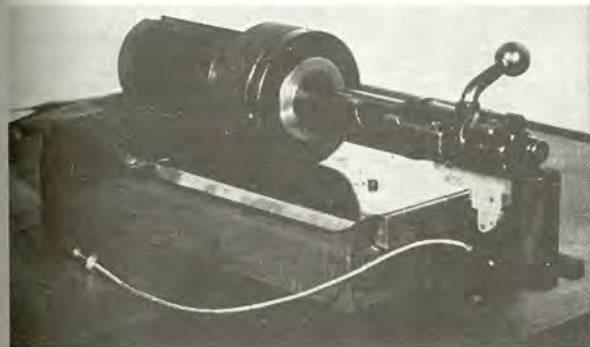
In barrel-holding fixture, barrel is held at muzzle and breech as in pistol. Device is doweled and bolted to heavy cast iron base. Patented remote control trigger is activated by cable release
